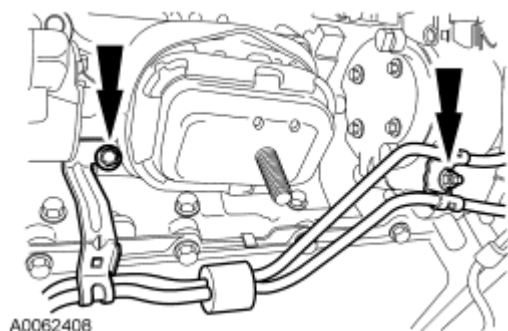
Transmission Cooler Tube Brackets & Fasteners
